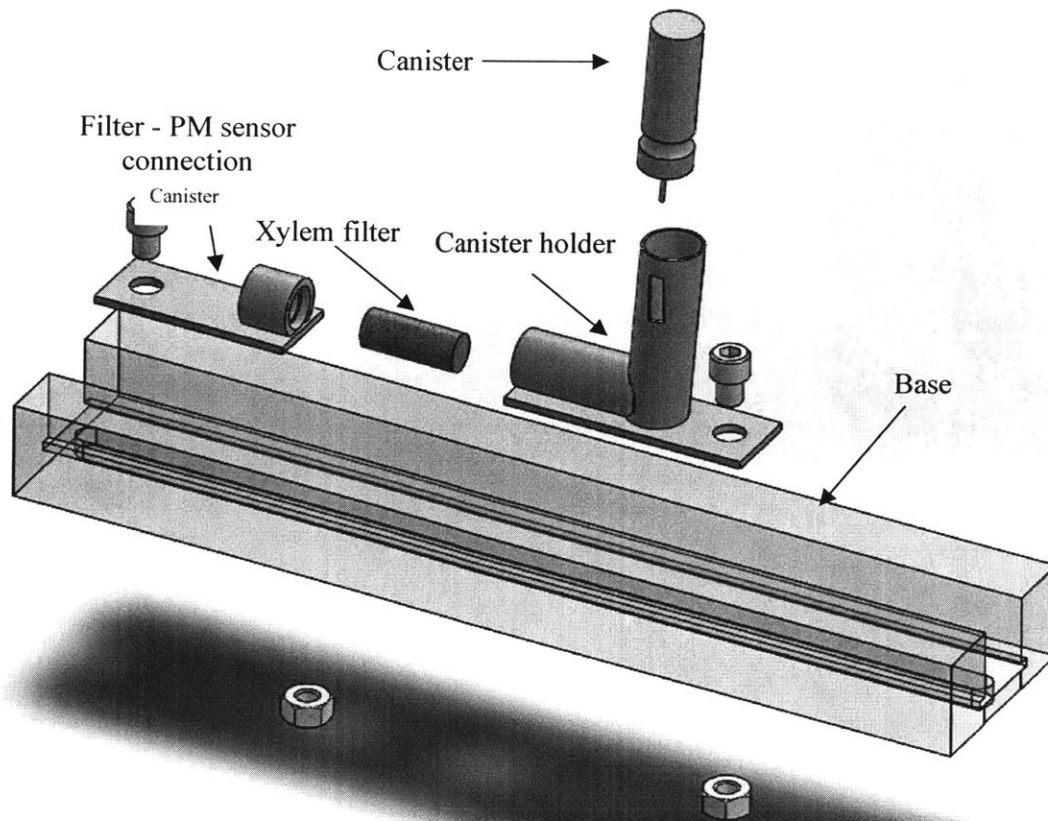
Labeled exploded view of CAD rendering of inhaler-inspired air testing apparatus.
